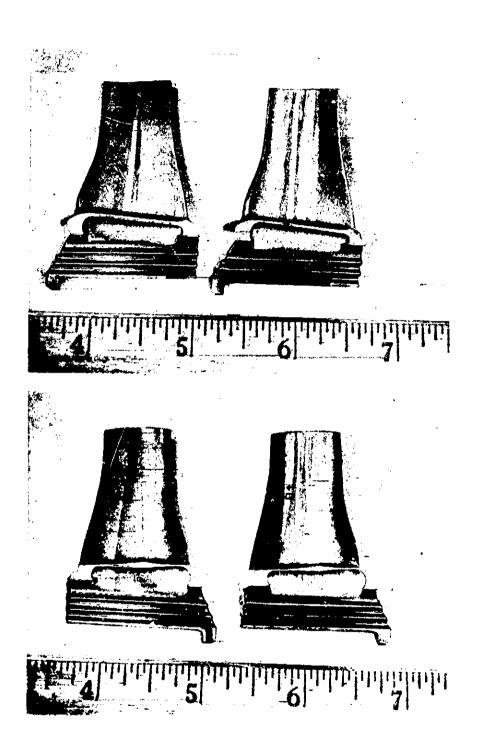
(9. Pressure and Suction Sides of Two Finish-Machined Exothermically Cast DS TFE731-3 Final Design Blades
